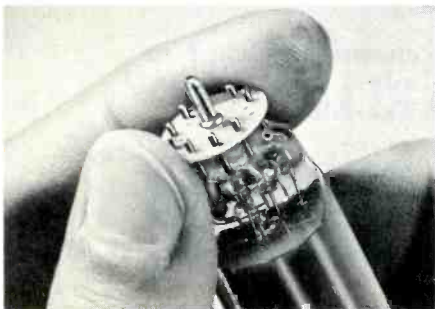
Tube Socket Locator. (Courtesy CBS-Hytron.)
